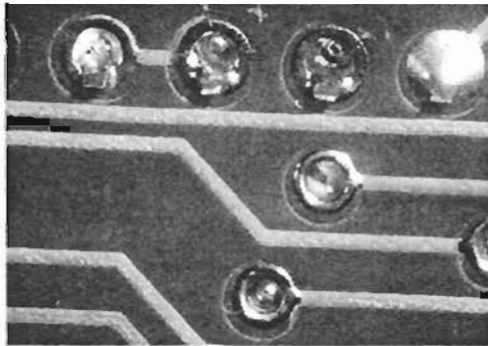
Sunken solder fillets due to outgassing (EPS)
